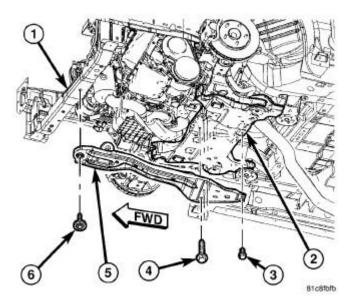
Identifying Fore-Aft Crossmember Courtesy of CHRYSLER LLC
